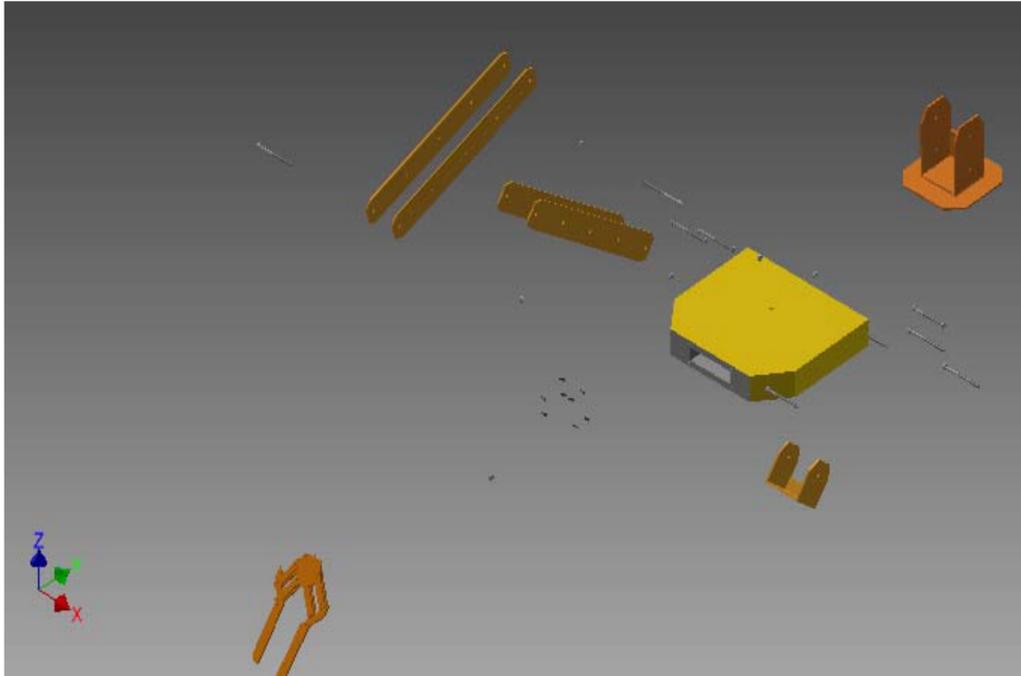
CAD of exploded view of component structure of the robotic arm drawn in Autodesk Inventor.
